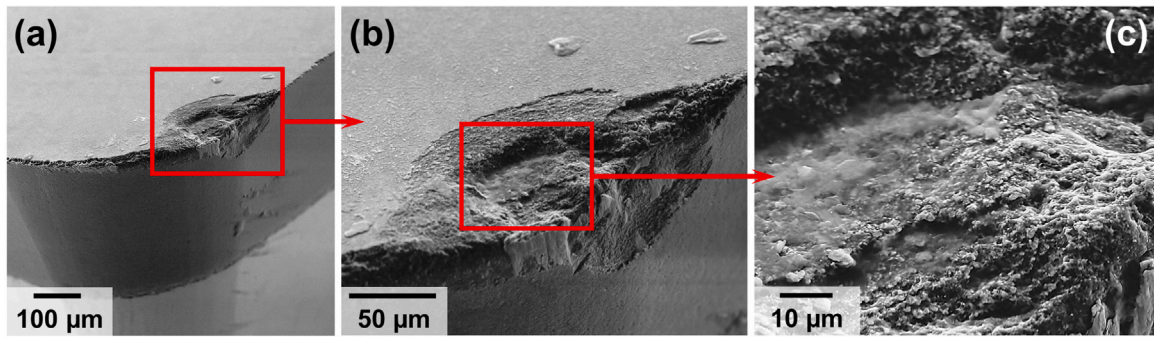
SE images of the PCD(A) cutting edge when machining at 450 m/min, 0.0134 mm/z following, $t_c = 11.2$ min. (a) Shows a low resolution image of the cutting edge highlighting the location where spalling has occurred, (b) and (c) show higher resolution images of the spalling induced wear feature.
